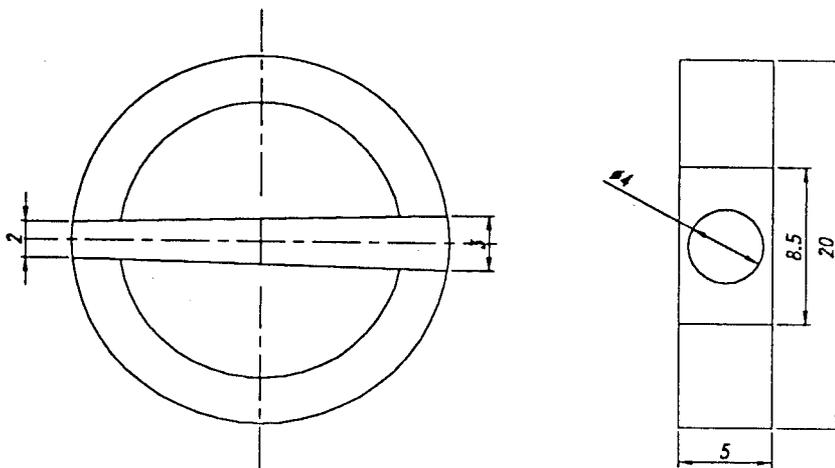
TABLE SCREW ROD LOCKING COLLAR
